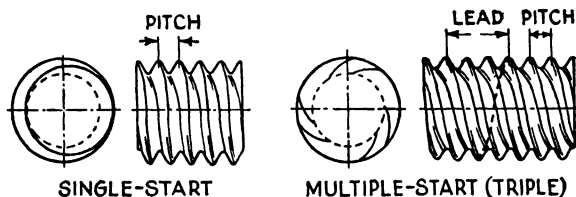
CONVENTIONAL VIEWS OF SINGLE-START AND MULTI-START VEE THREADS
